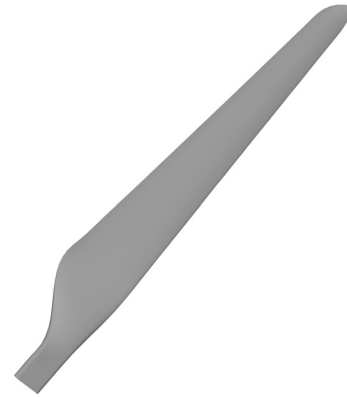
Schematic view of 1kW class optimized rotor blade model
